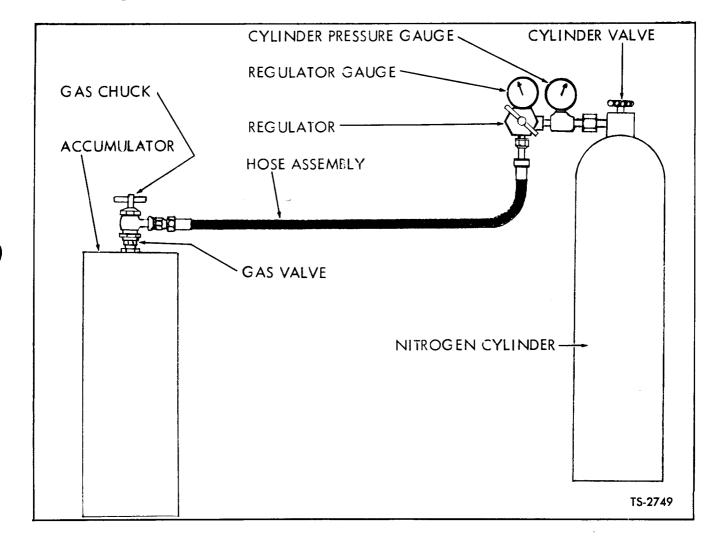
Accumulator Charging and Checking Device Hook-Up
